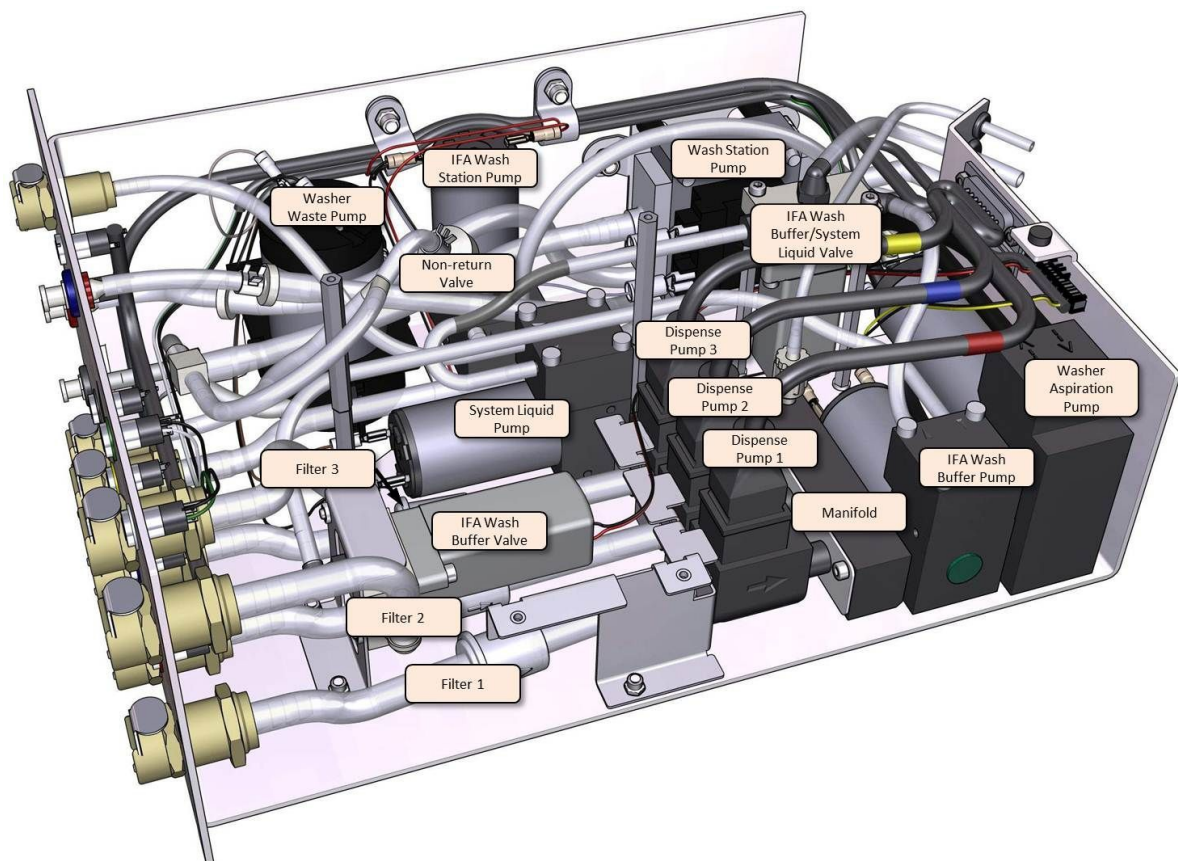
IFA pumps module overview (inside view - without liquid protection)
